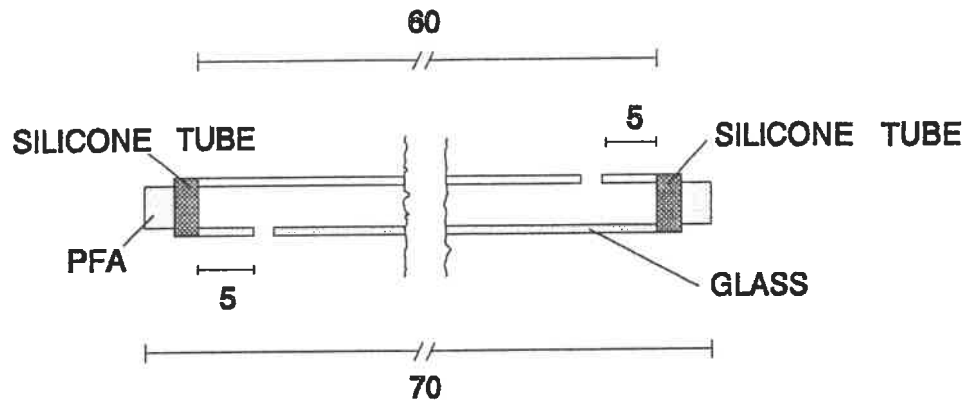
The PFA tube is kept in the glass tube by two pieces of silicone tubes.
